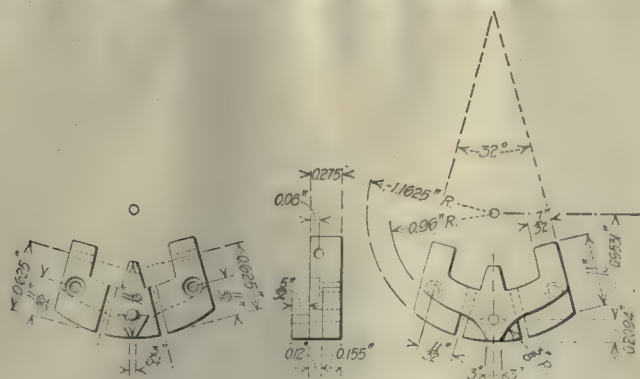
DETAILS OF BRASS CASTING TO BE MILLED
